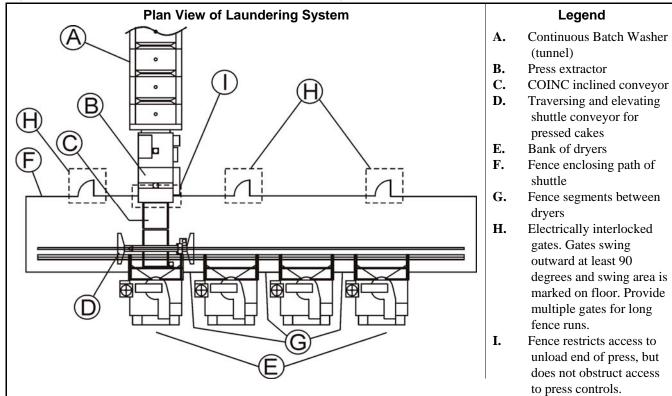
Example Fence Layout for Automated Laundering System Where One Tunnel Serves a Bank of Dryers
